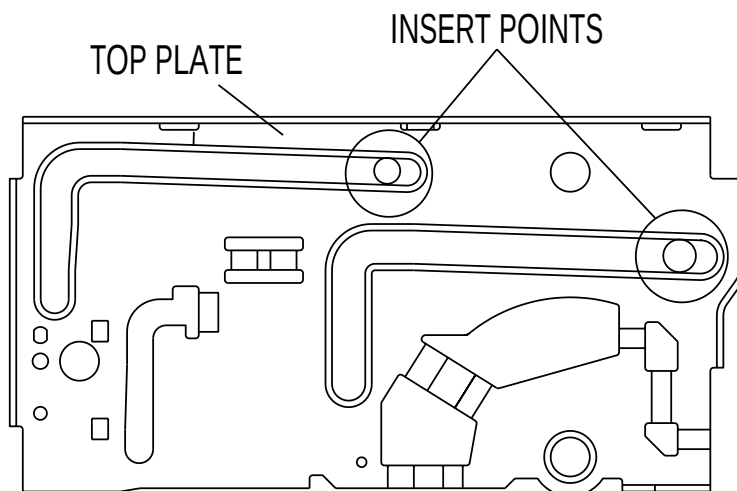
ASSEMBLY OF THE F/L ASS'Y
